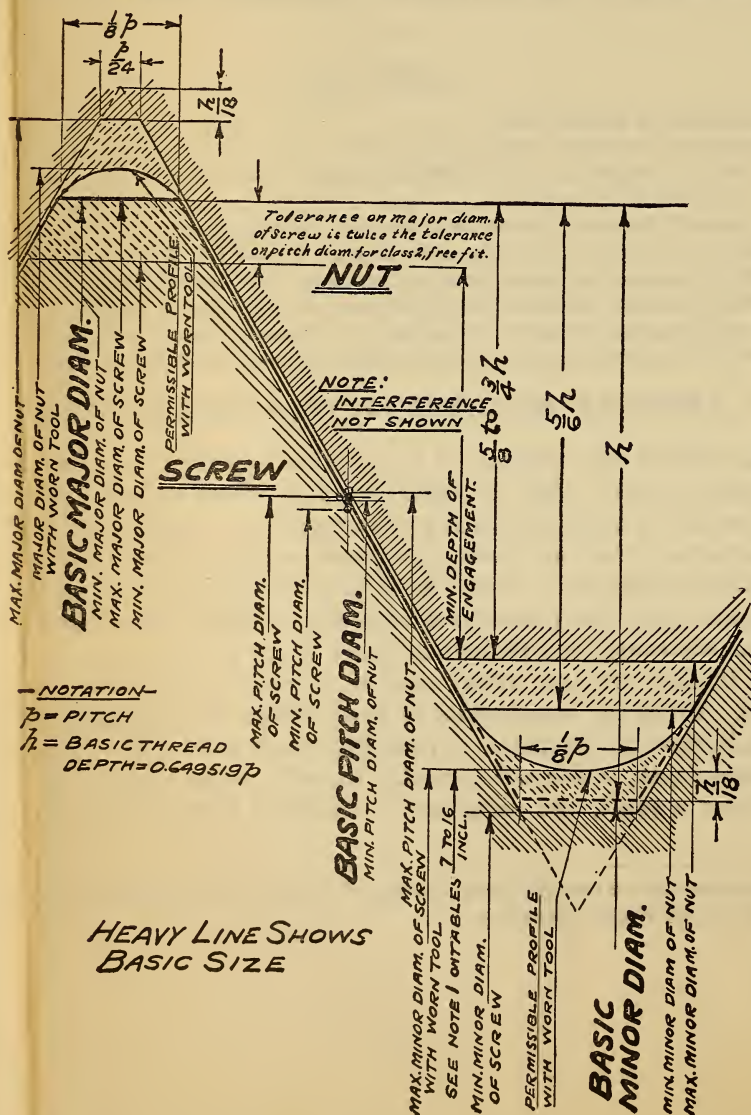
Illustration of tolerances and crest clearances for class 3, medium fit
